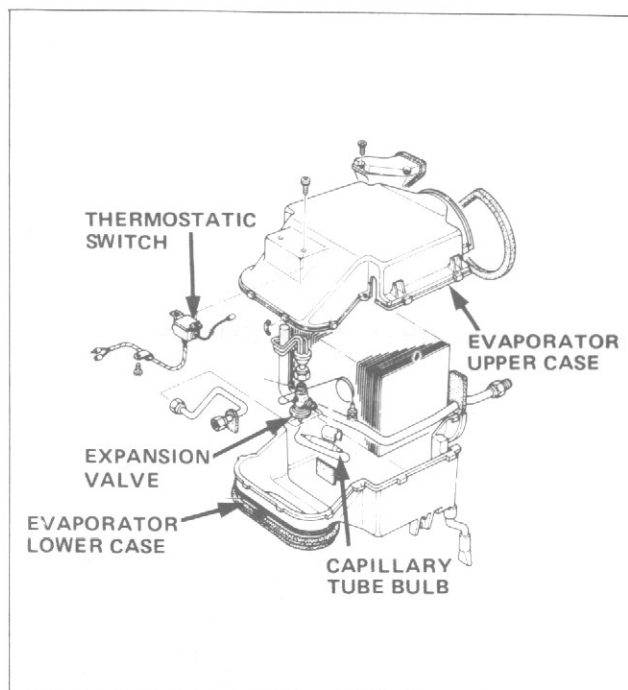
Evaporator, Expansion Valve and Thermostatic Switch
